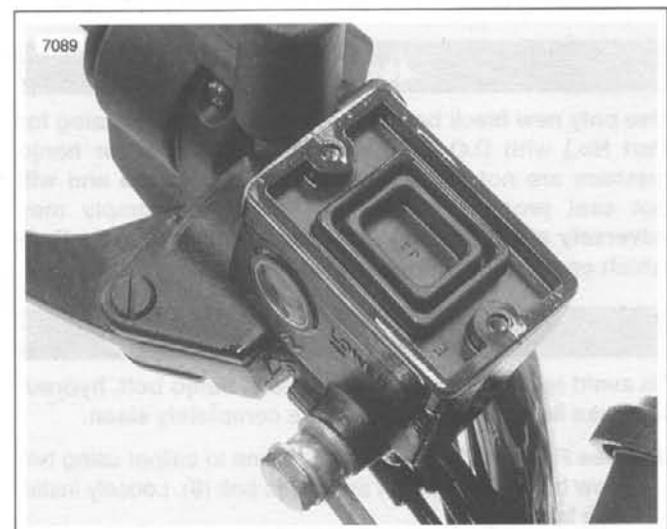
Front Master Cylinder Gasket (Insert not shown)
